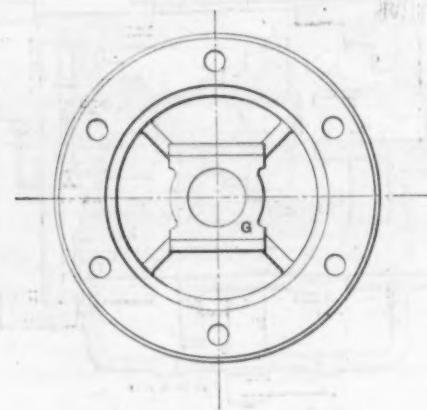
Crank Case Cover Plate, Showing Bearing for Valve Yoke.
